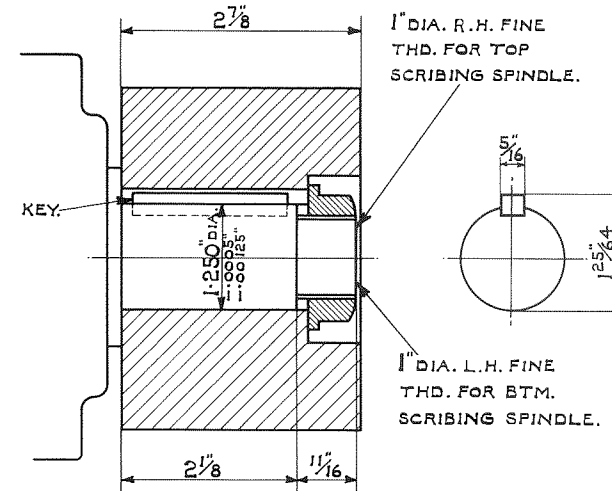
SCRIBING OR COPE HEAD SPINDLE END.
